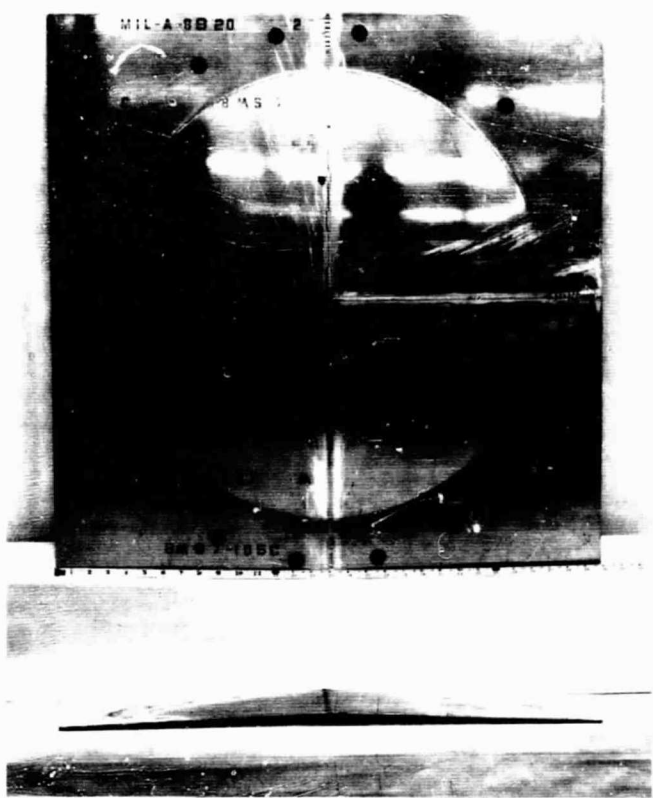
BULGE CONTOUR AND FRACTURE PATTERN OF PANEL CONTAINING TEE WELD
